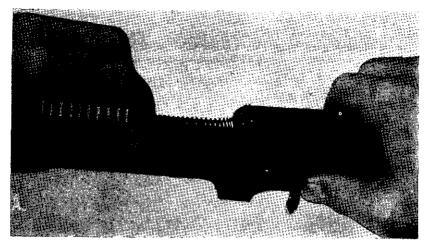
Removing the operating rod spring and operating rod spring guide. (1)
